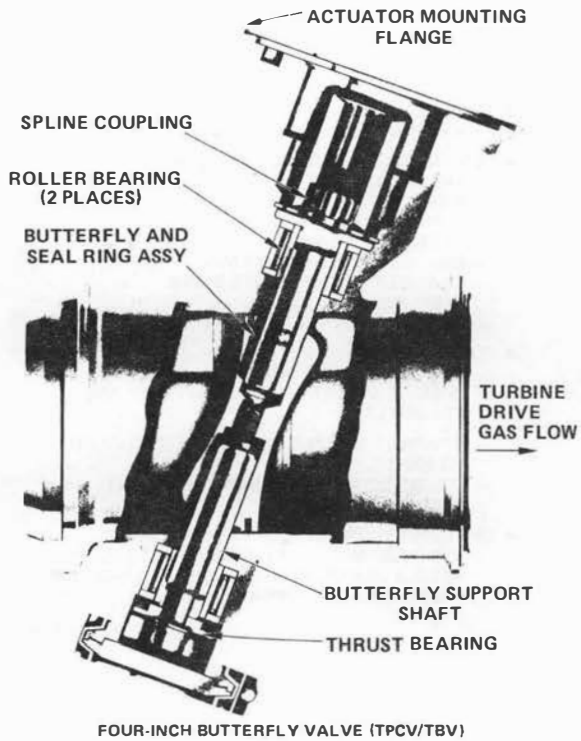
Typical coolant valve employed in the nuclear rocket engine.
